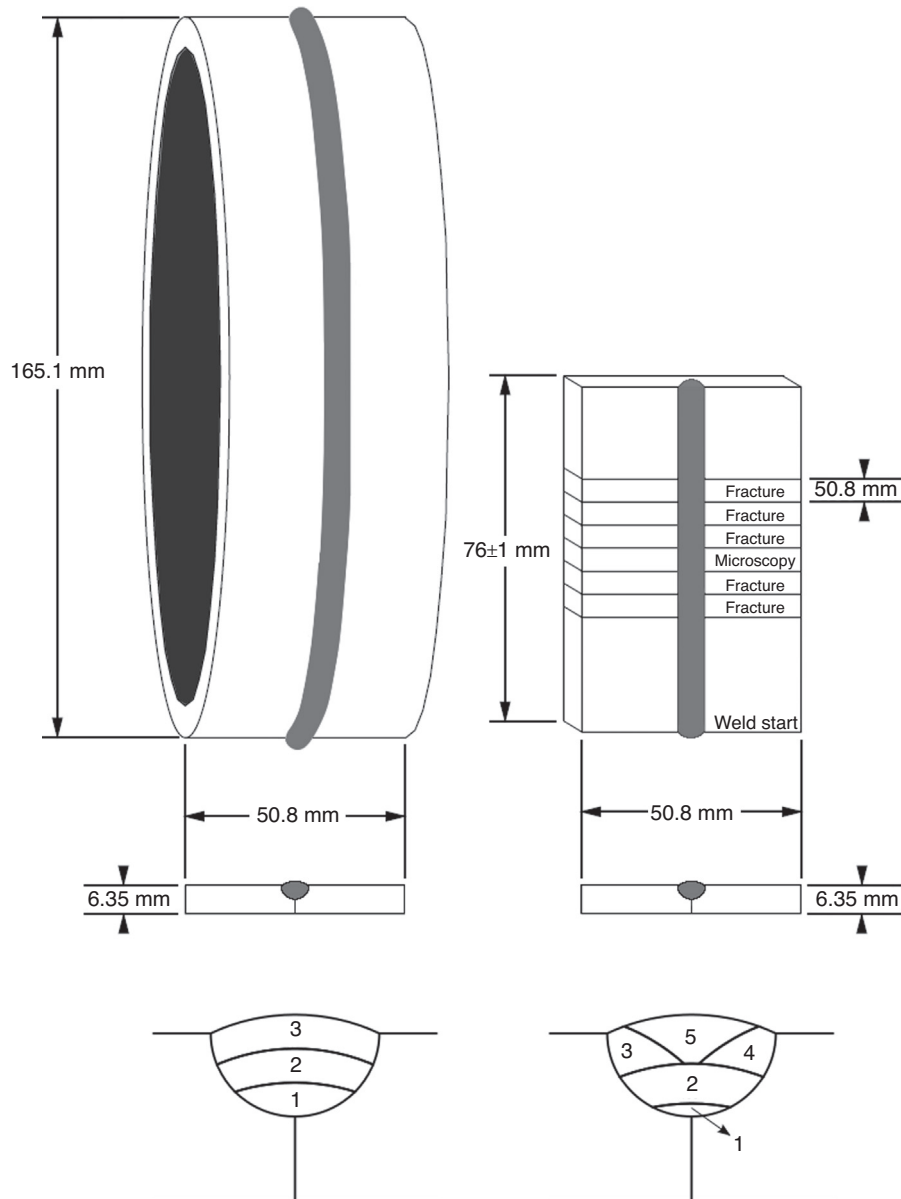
Weld schematics. (Left) PIGMA welded Be-ALSi weldment. (Right) TIG welded Co-AgCu weldment. Schematic shows weldment geometry and approximate pass locations for both the Be-ALSi and the Co-AgCu weldments, as well as the locations for our fracture and microscopy samples. The samples (right) are all undersized by approximately .35 mm due to the width of the wire in our EDM. Dimensions are all ± 08 mm unless noted otherwise. Image of Be ring modified from [8].
